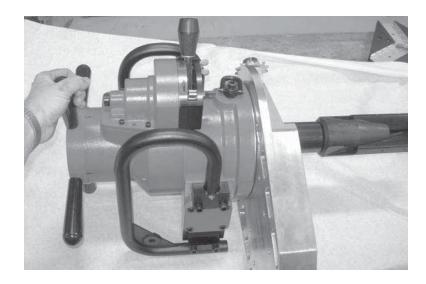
Turn the feed handle clockwise to engage the mandrel threads in the feed nut.
